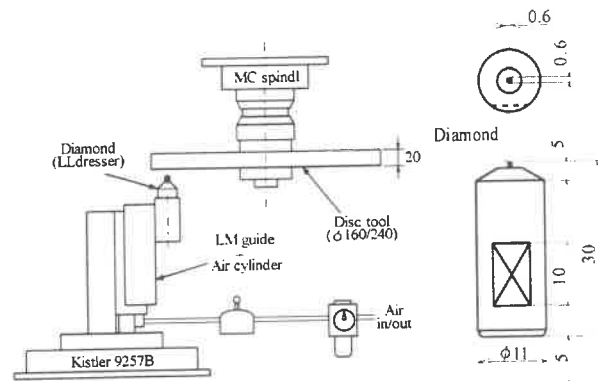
Schematic illustration of the Dynamic Friction Polishing and dimension of workpiece
